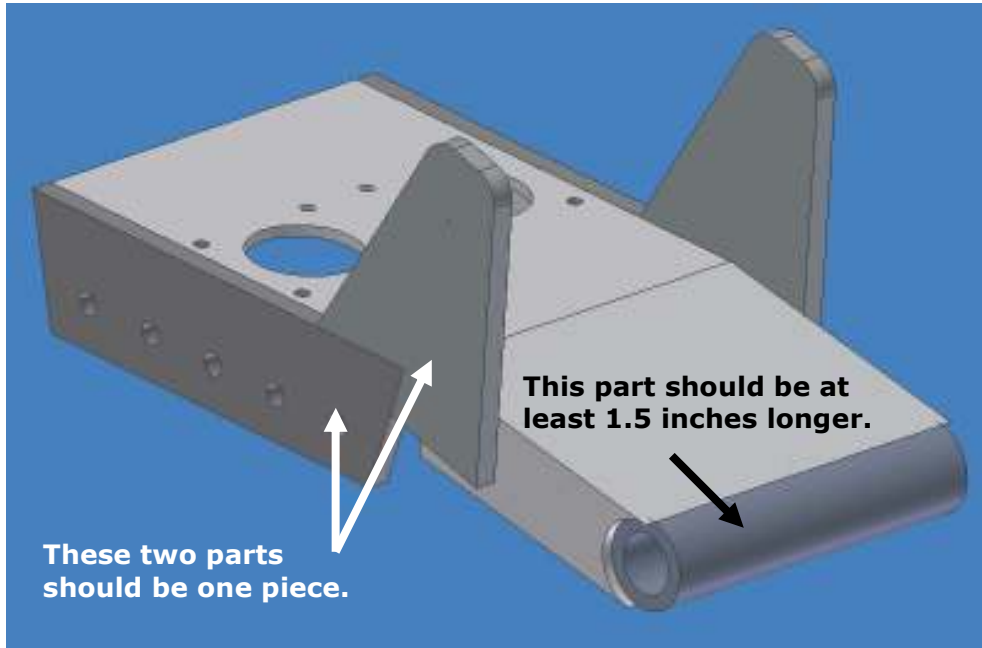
Visual of Recommendations to Make Manufacture Easier on the Channel Frame Assembly.
